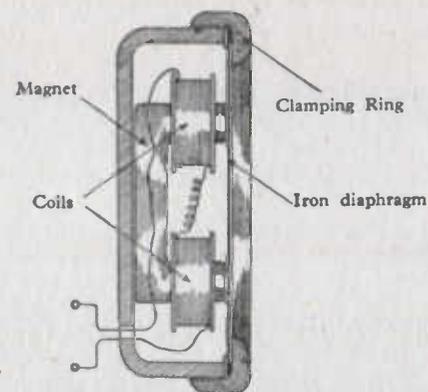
SECTION OF A TELEPHONE EARPIECE
